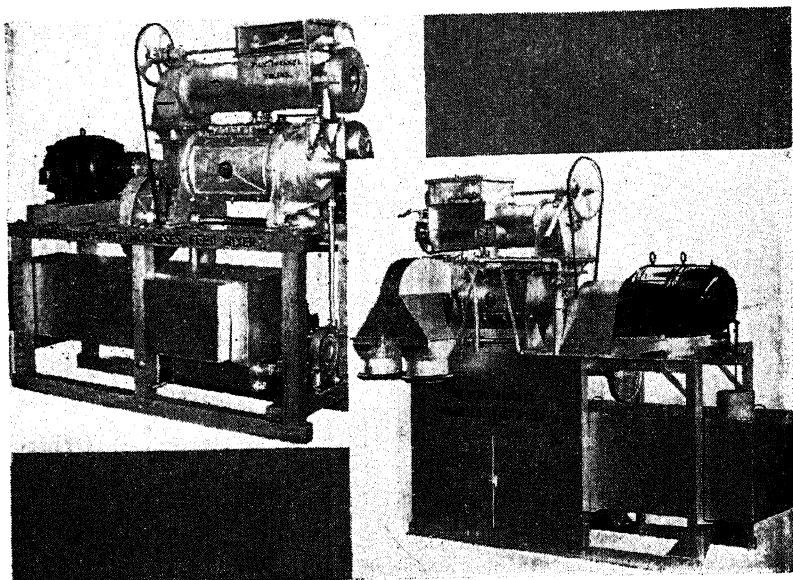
Molasses feed mixer. Left: Former construction with cast mechanism and wooden base. Right: Welded steel construction. Redesigned for welding resulted in a stronger, lighter and better looking product with cost savings of \$72.00. Also misalignment troubles of the old base have been eliminated.
